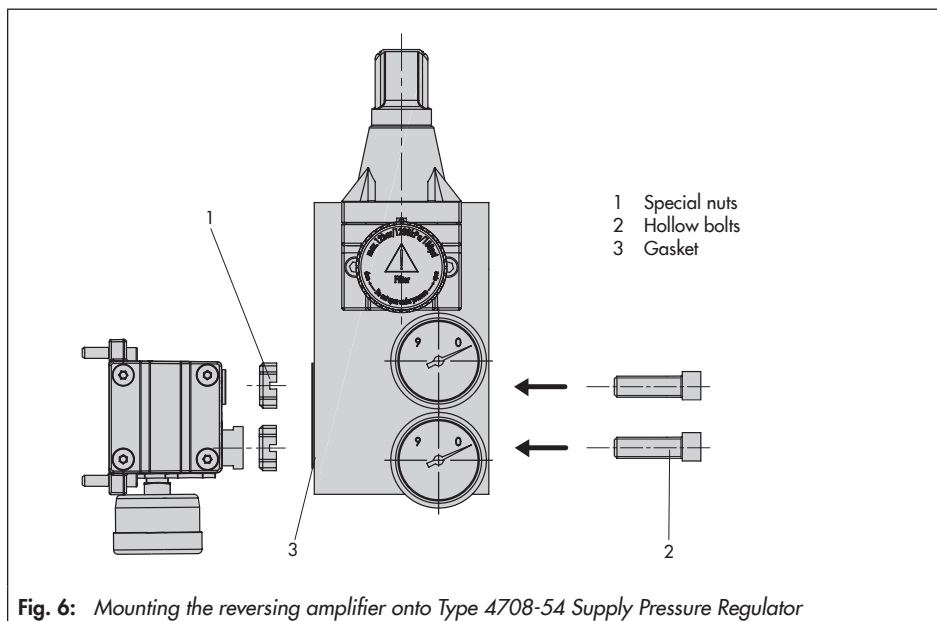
Mounting the reversing amplifier onto Type 4708-54 Supply Pressure Regulator
